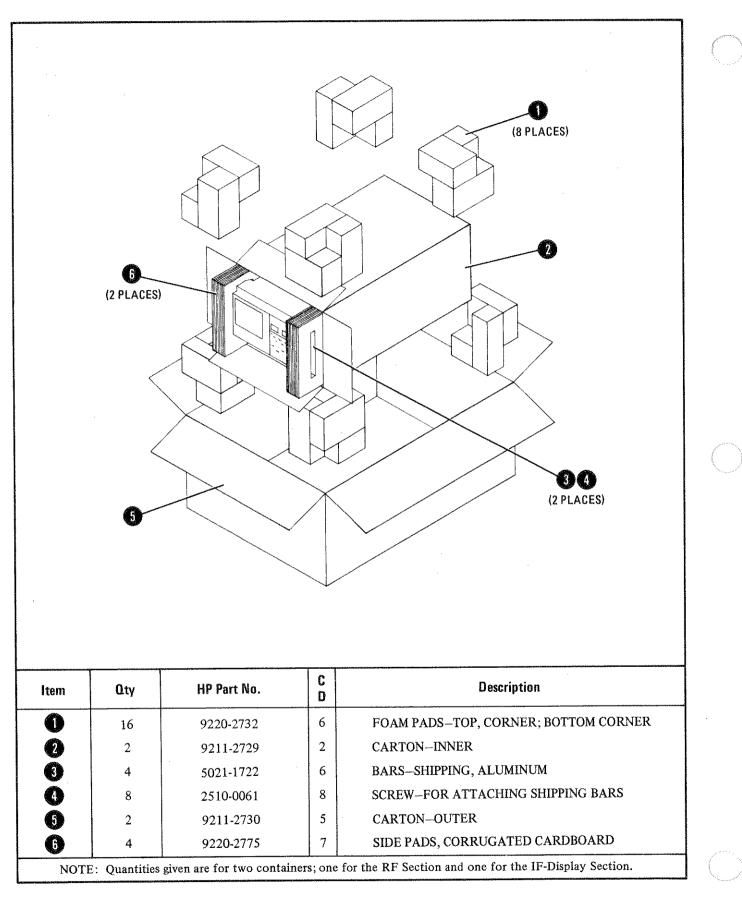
Packaging for Shipment using Factory Packaging Materials
